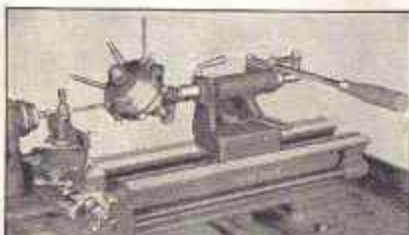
Turret Mounted on Spindle of Hand Lever Tailstock, Takes Six Tools
